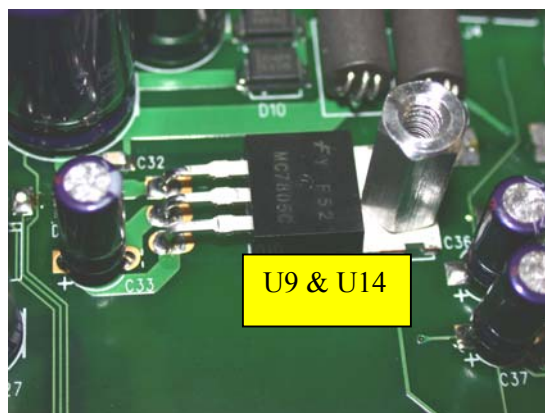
Install standoff (30-12-2210) to U8-9 & U14 using screw (30-00-0607) to hold in place.
